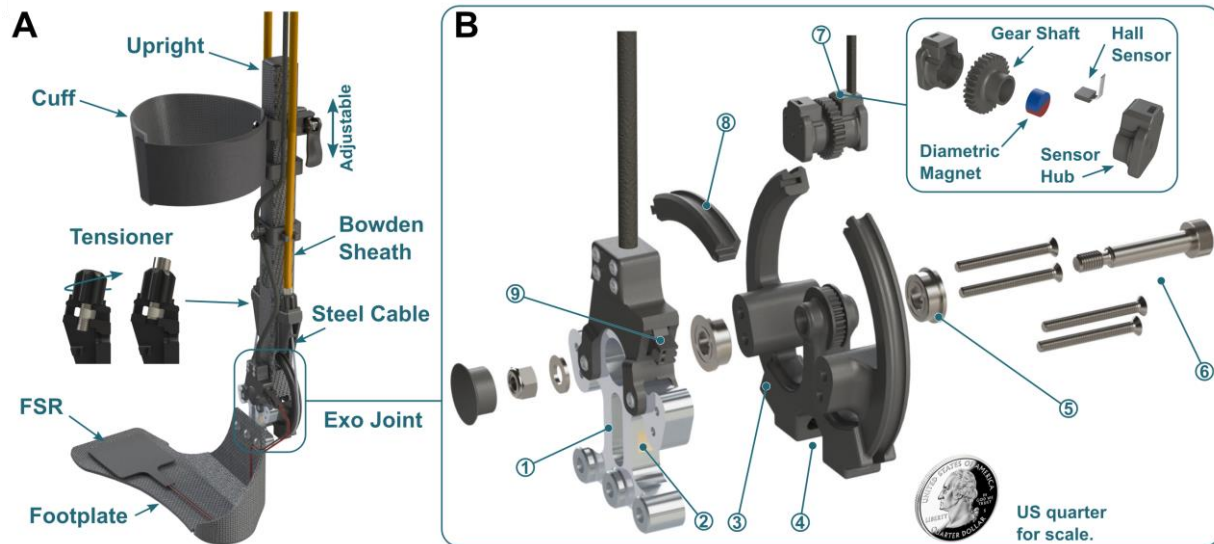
Ankle Assembly. A. Assembled view of an entire ankle assembly, including calf cuff, machined carbon fiber upright, tensioners, instrumented pulley, and footplate. Tensioners compressed the Bowden sheath via a pull-and-twist knob and kept the cable transmission taut. B. Exploded view of the exoskeleton joint. 1) Torque transducer 2) Strain gage. 3) Carbon fiber-reinforced pulley. 4) Steel cable transmission crimping site. 5) Thrust ball bearings. 6) 6mm shoulder bolt. Four steel bolts fixed the torque sensor to the pulley. 7). Angle sensor assembly and exploded view. A gear shaft meshed with the pulley rotated a diametric magnet underneath a stationary Hall sensor. The resulting voltage was used to calculate joint angle and angular velocity. 8) Removable pulley bridge allowing assembly within the carbon fiber tube. 9) FSR connection.
